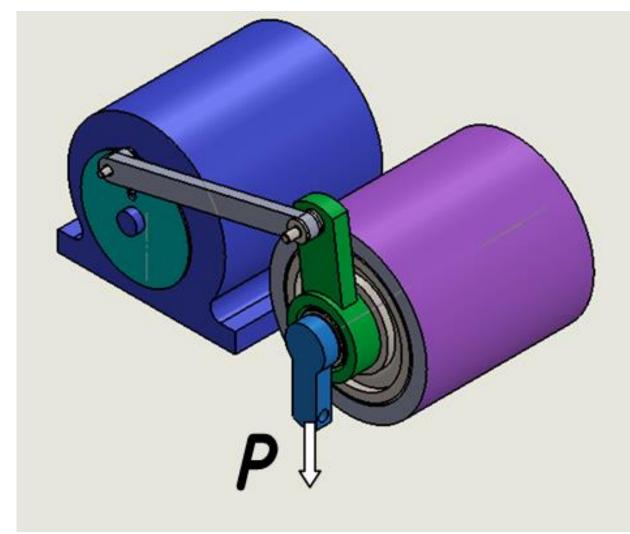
Scheme of installation of spherical plain bearings till 20 ton
